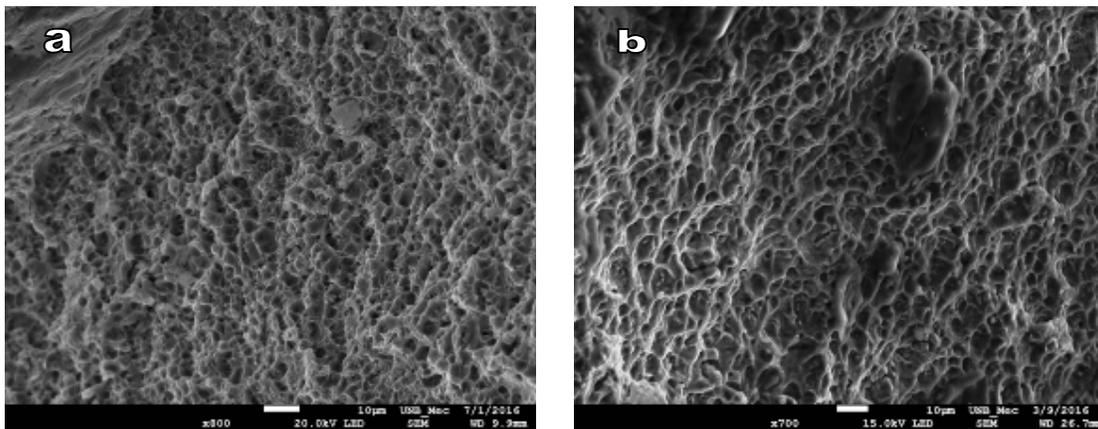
Final Region of fracture surface showing equiaxial dimples. (a) Cable “A” wire and (b) cable “B” wire.
